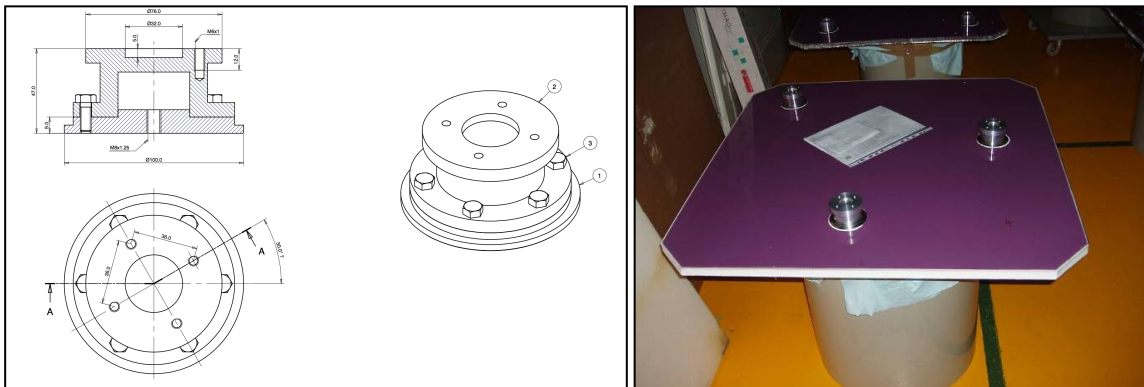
Left: mechanical drawing of a generic pad and its adapter. Right: pads and adapter on the panel.
